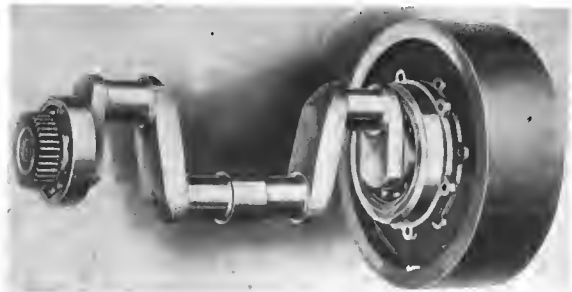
Chalmers Two-Bearing Crankshaft Complete.
